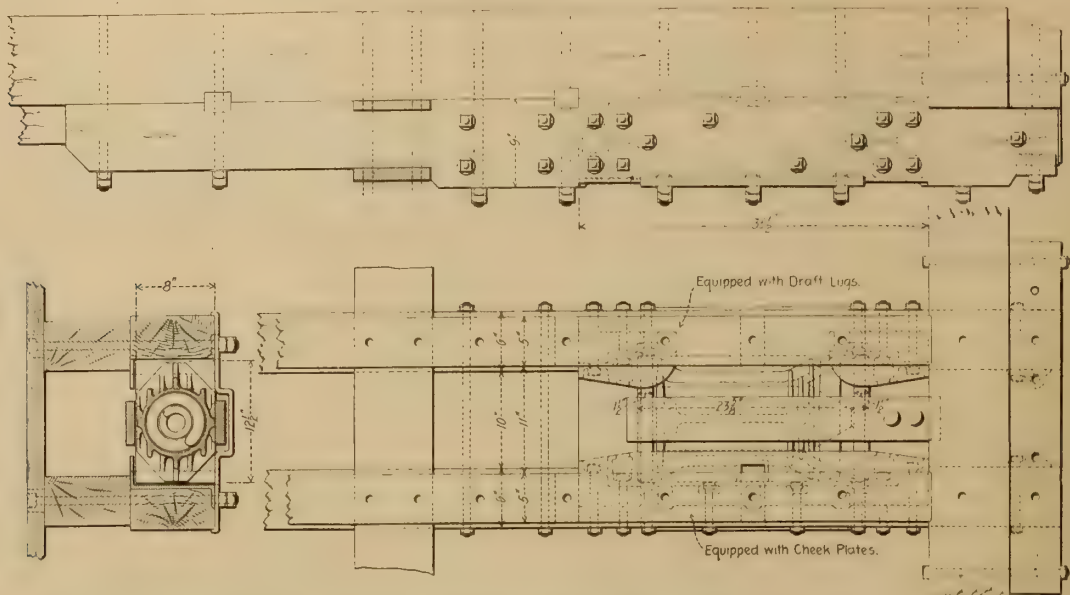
APPLICATION OF WESTINGHOUSE FRICTION DRAFT GEAR TO 100,000 LB. STEEL GONDOLA. P. R. R. WESTINGHOUSE AIR BRAKE CO.
